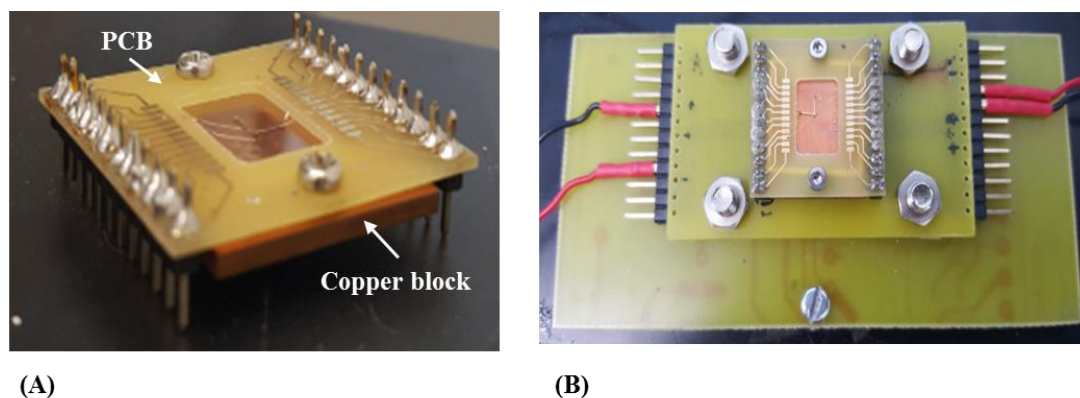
Photographs of a full packaged device, the DEP capillary driven microfluidic that built on a glass substrate, and contact arrangement. The fabricated chip fixed between PCB and copper block. The PCB with gold plated pads is used for microelectrodes contacts wirebonds and the 24 way connector pins allows easy electric connection to drive boards in use with final fully integrated device with lasers and photo-detectors. (B) A plugged sample into an in-house-made holder unit and contact arrangement to be powered by an AC signal.
